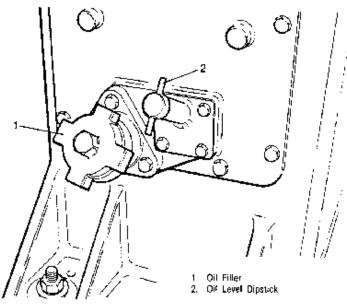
Air Compressor Lube Oil Gauge and Filler
